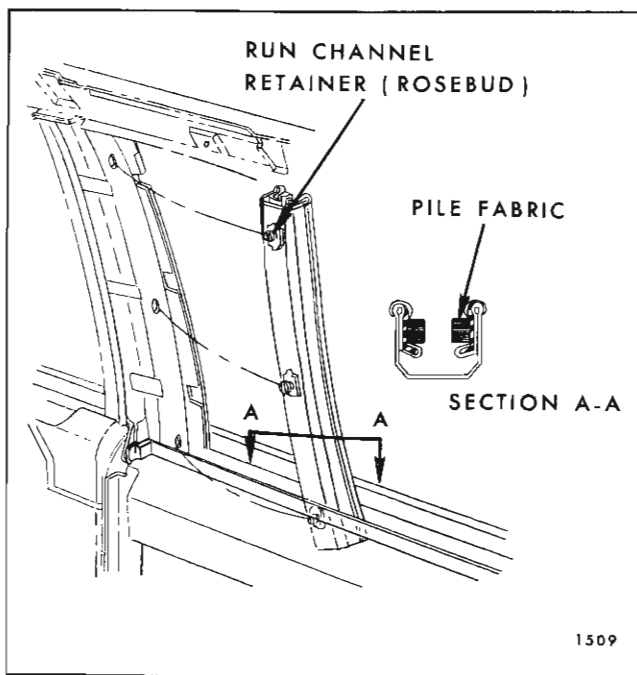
E20—Rear Quarter Window Front Glass Run Channel "15" - "11" Styles
